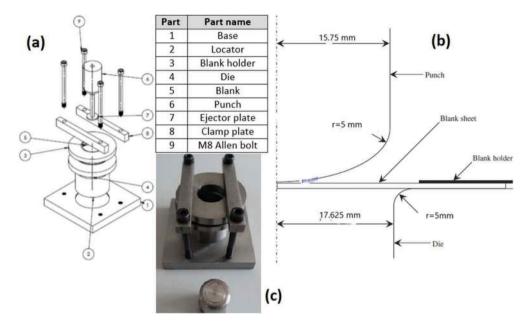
(a) Exploded view of forming tool with blank holding system (b) Geometry of forming tools (c) Assembled forming tools.
